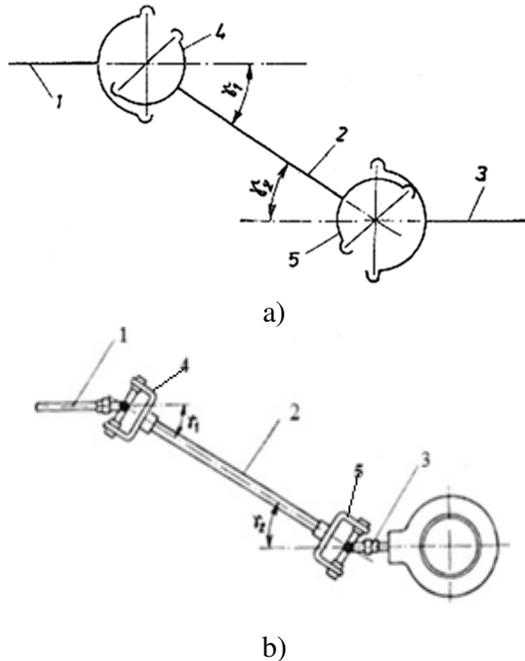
Cardan shaft with U-joints in phase: (a) cardan shaft diagram (b) cardan shaft construction variant; 1- input shaft; 2- cardan shaft; 3- output shaft; 4- input U-joint; 5- output U-joint;
